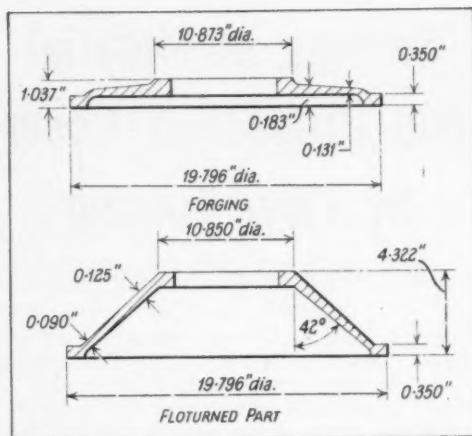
Dimensions of Forging and Completed Intermediate Bearing Support. Previously, the Part was Machined from a Forging of the Required Depth
